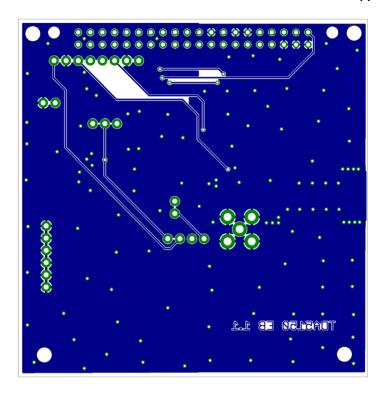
Infineon Evaluation Board V1.1, copper layer on bottom side
